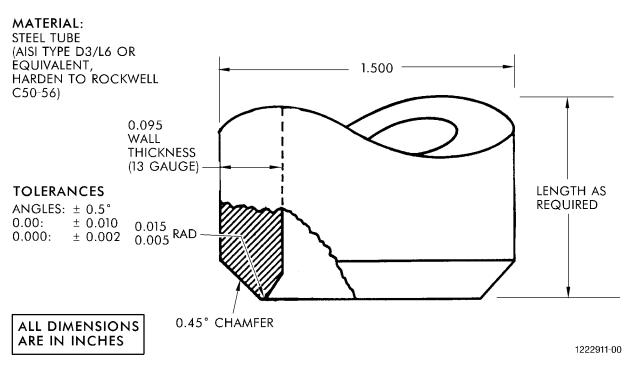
Spherical Bearing Swaging Tool LMT 806
